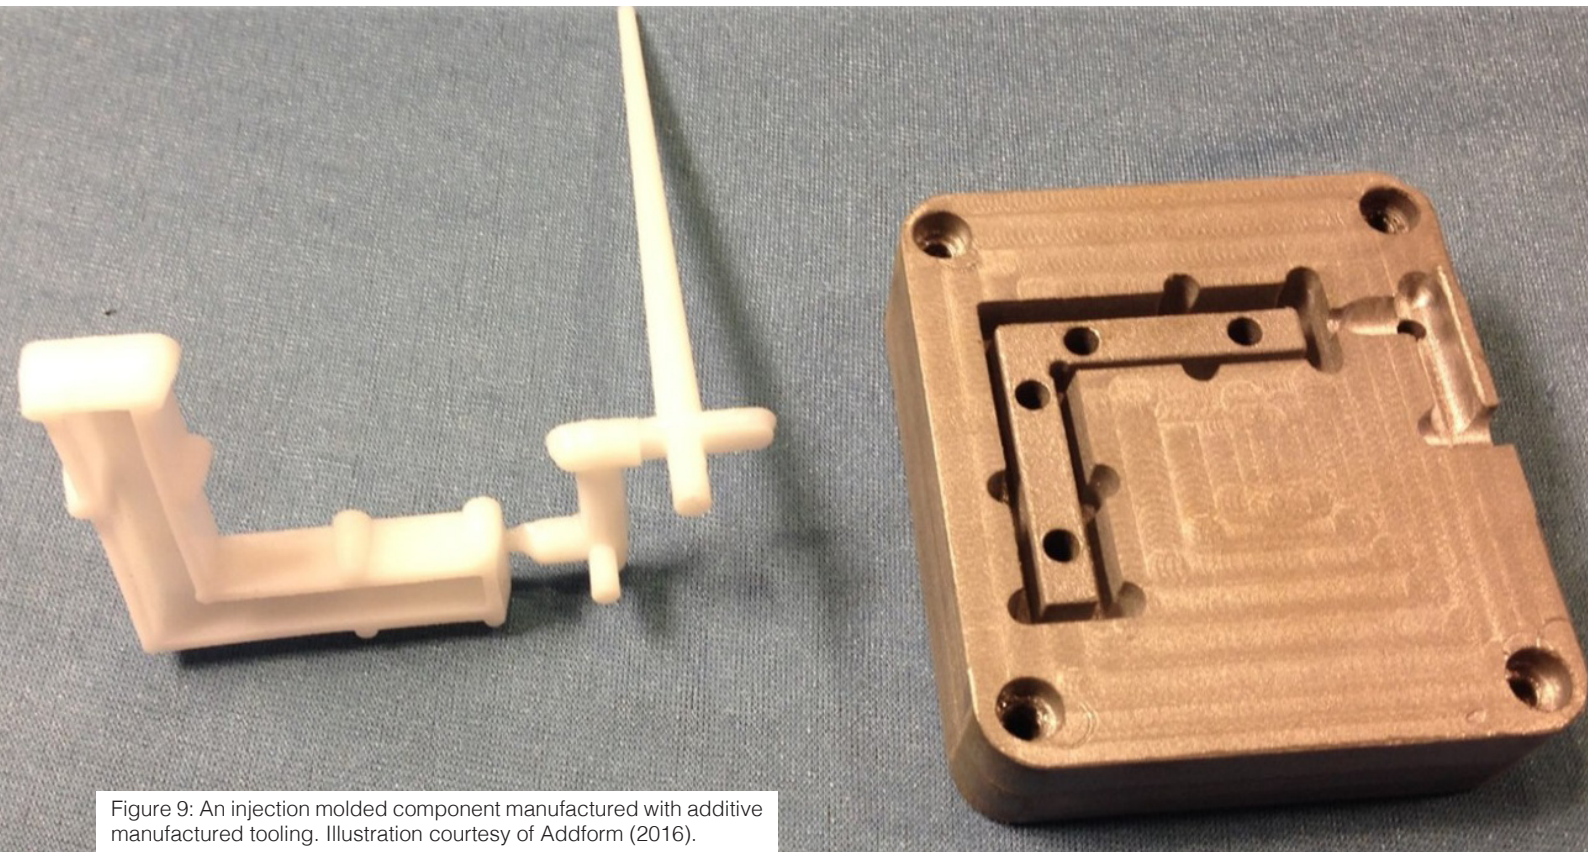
An injection molded component manufactured with additive manufactured tooling. Illustration courtesy of Addform (2016).
